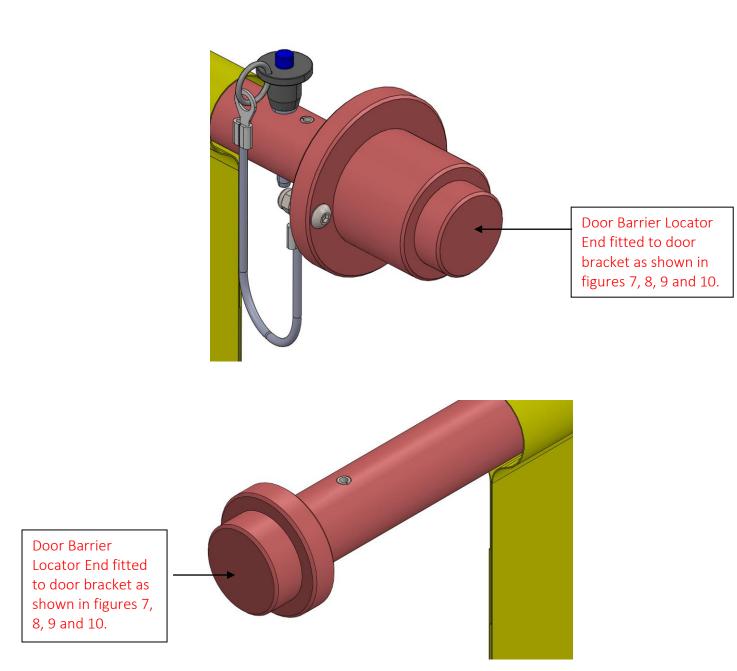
Door Barrier Locators (Part no. 511CA29)
